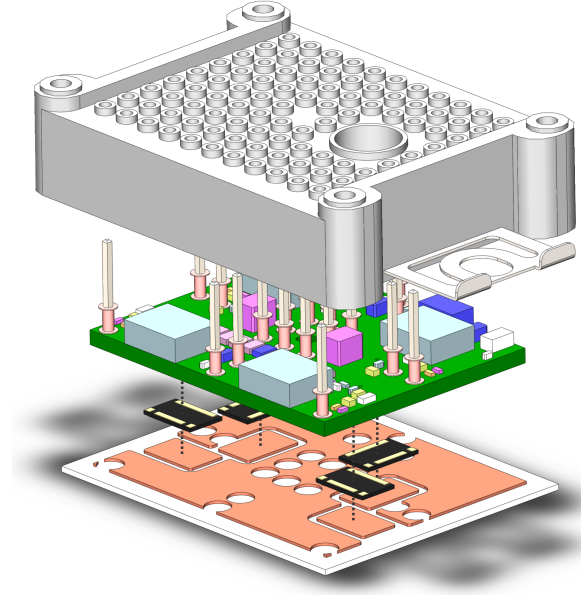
Three dimensional rendering of the GaN eHEMT power module stack assembly. DBC dimensions are 36x28 mm.
